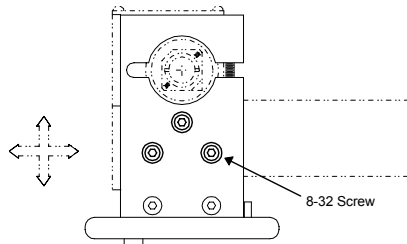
Mounting holes of the internal DFM components that securely hold the internal components to the DFM module.
